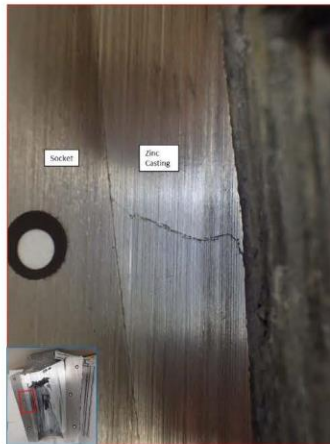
Close up view of the crack present in the zinc casting, running between the inner diameter of the zinc casting, where the cable/zinc slug pulled out, and the outer diameter of the zinc casting. This image was taken from the 9 o'clock half at 12 o'clock.
